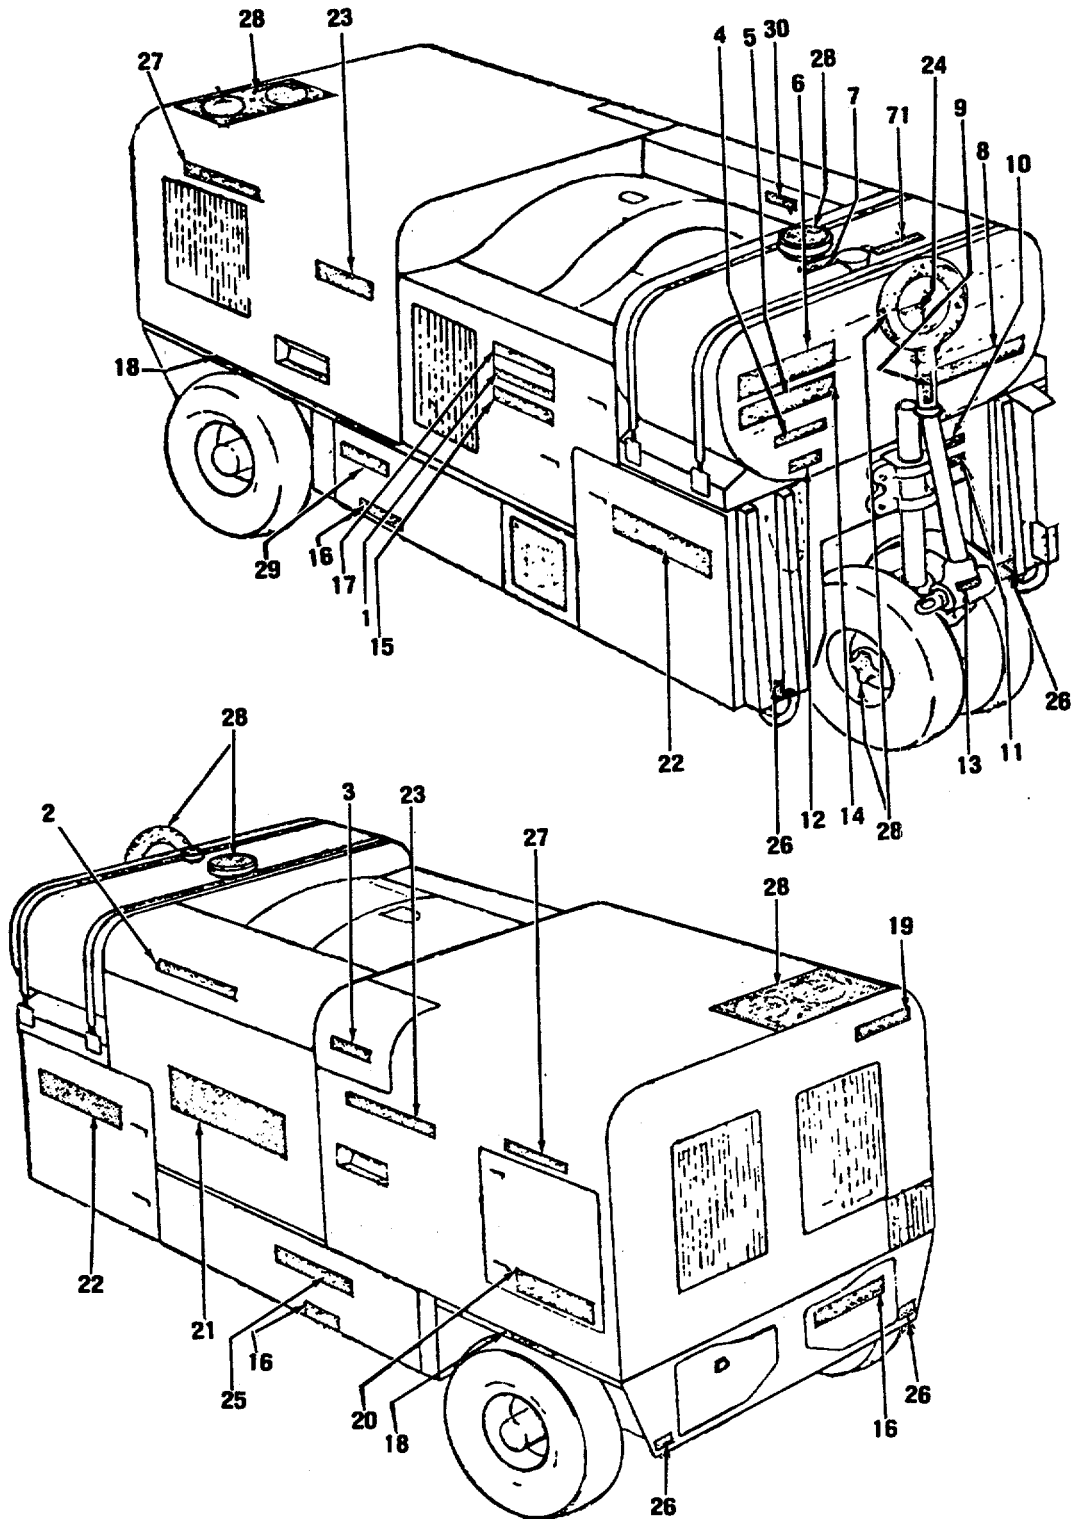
Stenciling and Markings for Generator Set (Sheet 1 of 2)
